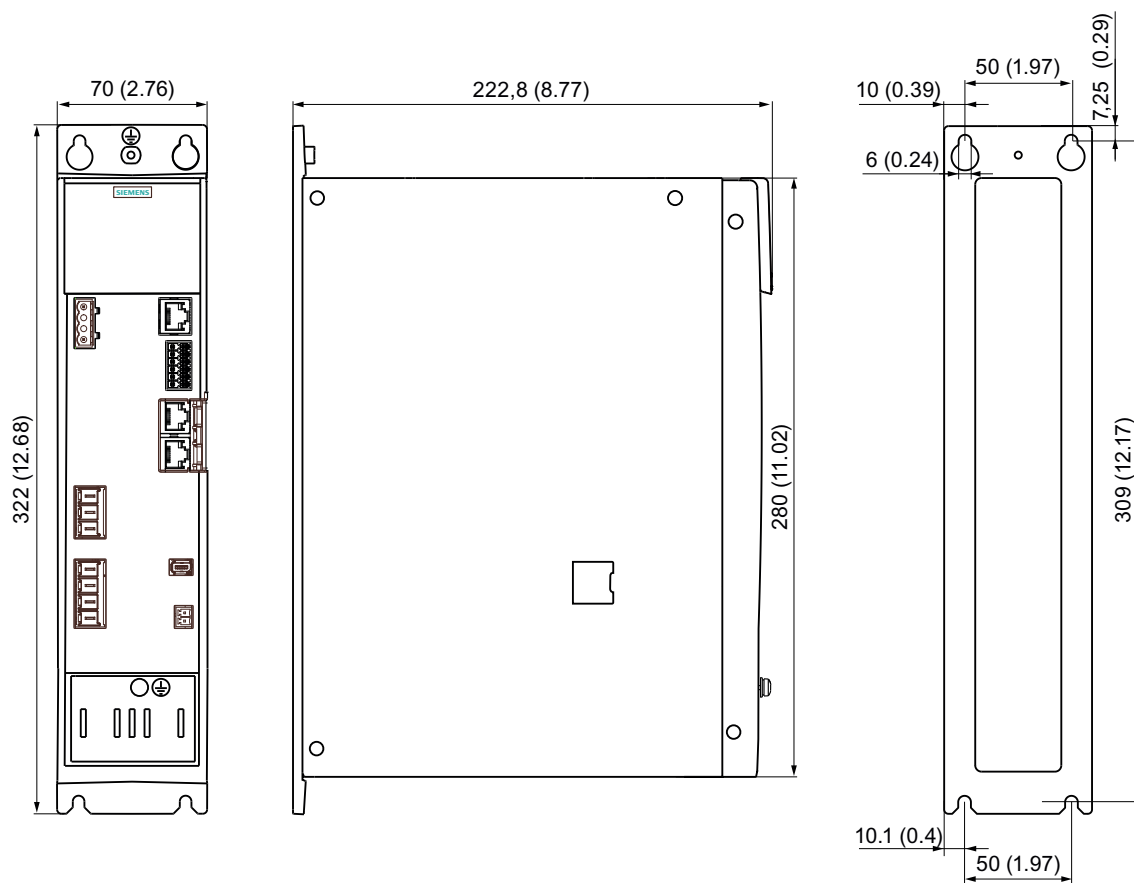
Dimension drawing SINAMICS S210 FSB, 3 AC, dimensions in mm (inch)
